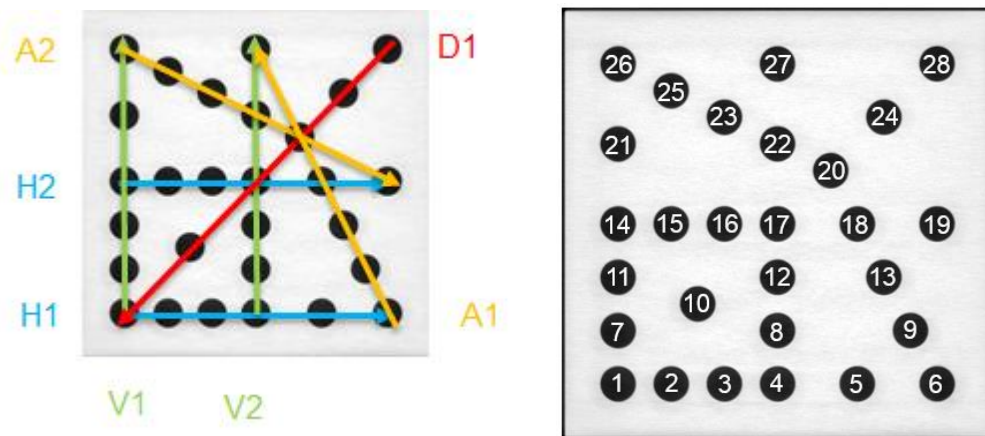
Illustration of hole- plate showing direction of hole-lines and hole ID number.
